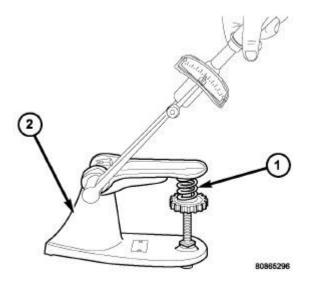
TESTING VALVE SPRING Courtesy of CHRYSLER LLC
